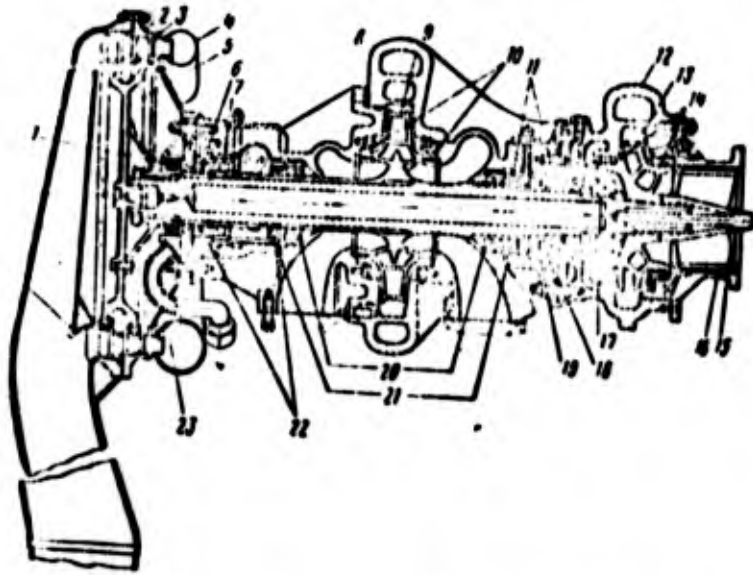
Turbopump unit of the aircraft Liquid-propellant Rocket Engine XRL-99: 1 - Seal; 2 - Turbine casing; 3 - Nozzle unit; 4 - Inlet manifold of turbine; 5 - Turbine disk; 6 - Thrust ring of bearing; 7 - Bearing; 8 - Diffuser of fuel pump; 9 - Impeller of fuel pump; 10 - Seal of fuel pump; 11 - Seal; 12 - Diffuser of the oxidizer pump; 13 - Impeller of oxidizer pump; 14 - Seal of the oxidizer pump; 15 - Preliminary pump; 16 - Housing of preliminary pump; 17 - Seal; 18 - Thrust ring of bearing; 19 - Bearing; 20 - Seal of fuel pump; 21 - Fuel and oil drain; 22 - Seal; 23 - Drain of steam and gas.
